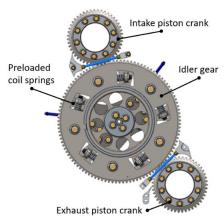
2.7L OP Engine gear train connecting intake and exhaust crankshafts
